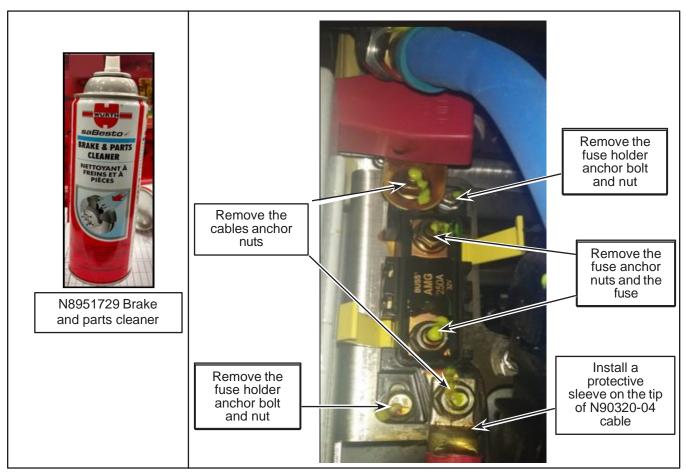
N8951729 Brake and Parts Cleaner and Typical N84769 Fuse Holder Installation
